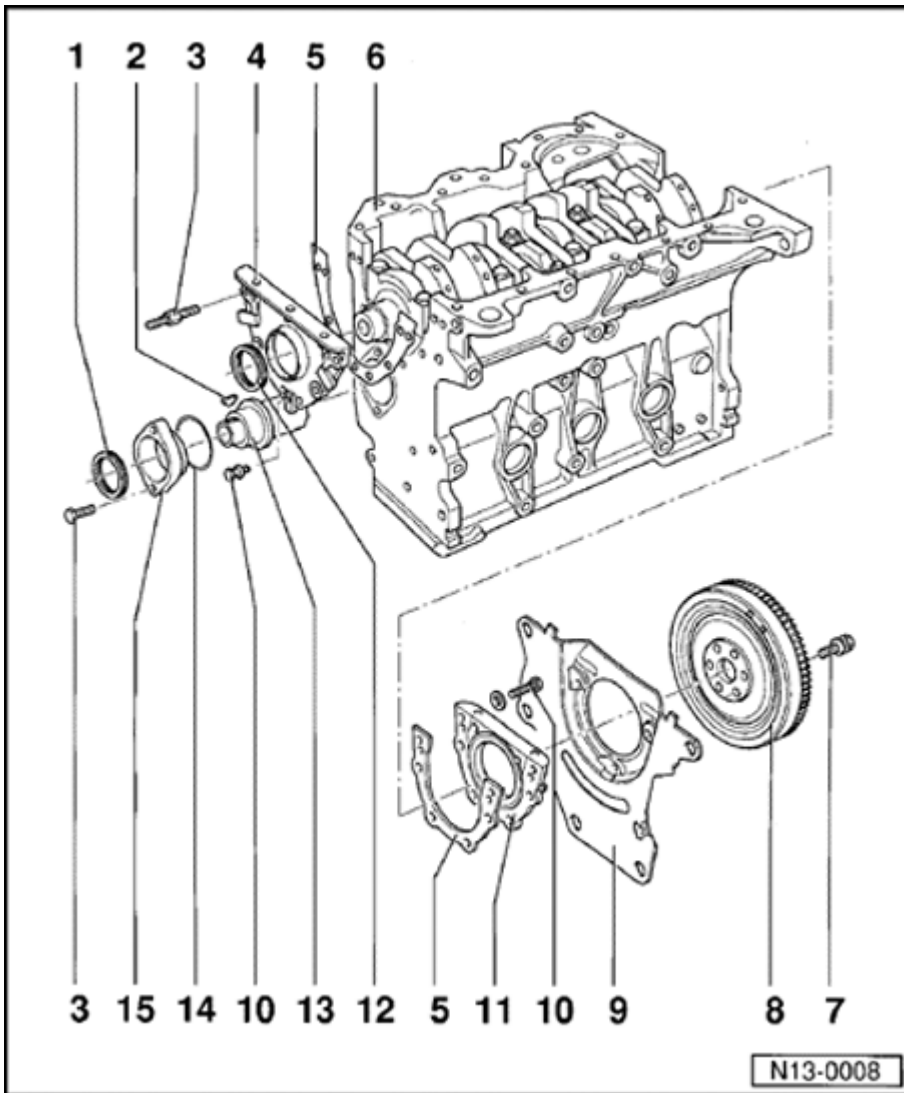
Sealing Flanges And Flywheel/Drive Plate, Removing And Installing Overview
